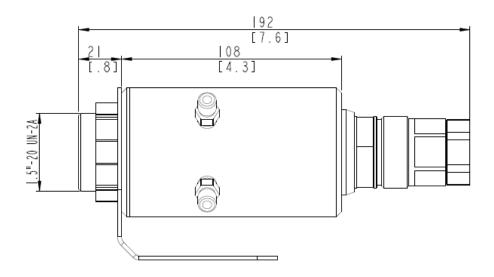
Dimensions of the Sensor with Terminal Connections and Water-cooled housing
